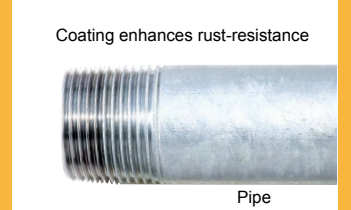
Thread is left with a layer of pipe coating (20-30 μm).
